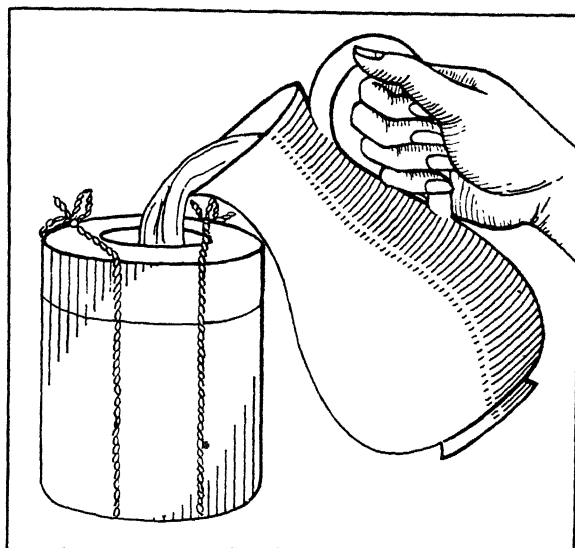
When filling a two-piece mold, rubber bands may be used to advantage in place of strings to hold the mold together. If the mold is worn, clay will be needed on the parting line to prevent the slip from running out. Do the pouring with as few bubbles in the slip as possible. Keep the mold full for twenty or thirty minutes and then empty it and set it aside for the casting to stiffen.
